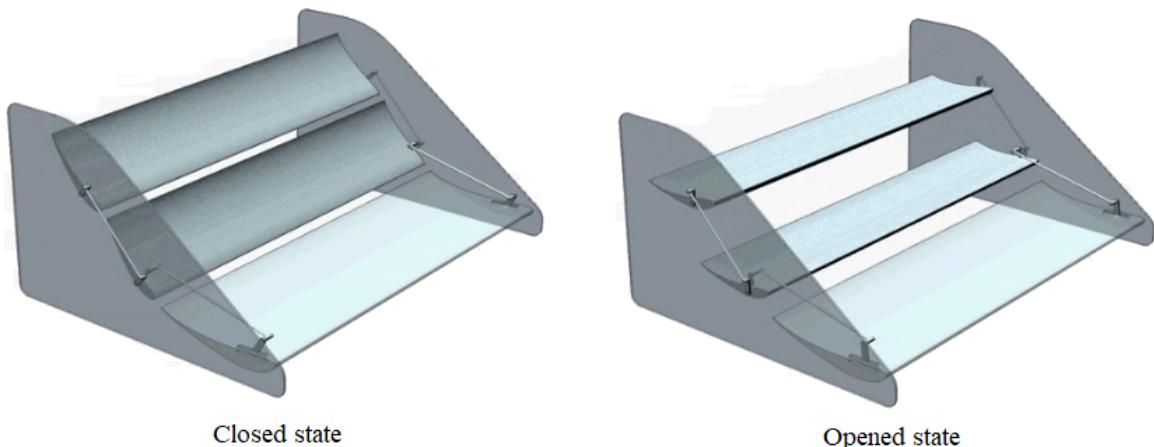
CAD assembly model in Siemens NX. Closed and opened state
